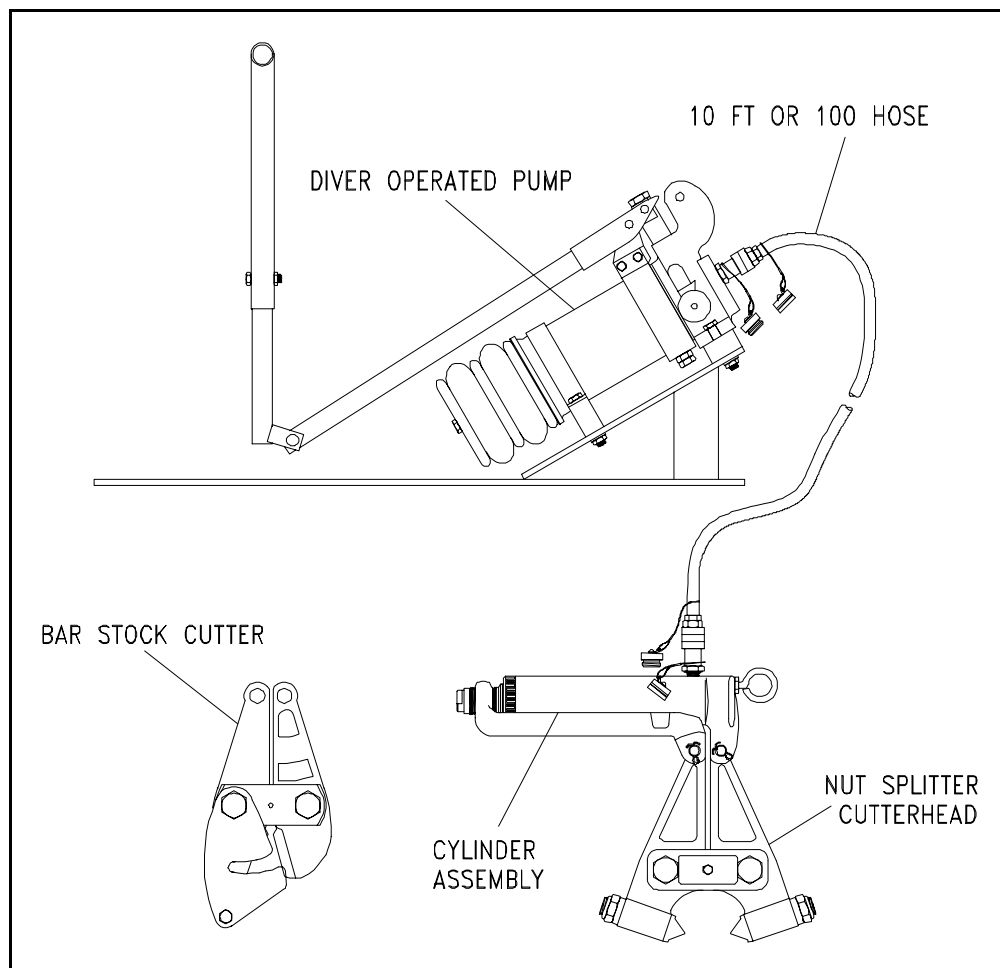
Bar Stock Cutter, Nut Splitter Cutterhead and Hydraulic Cylinder, used on Diver Operated Pump.
